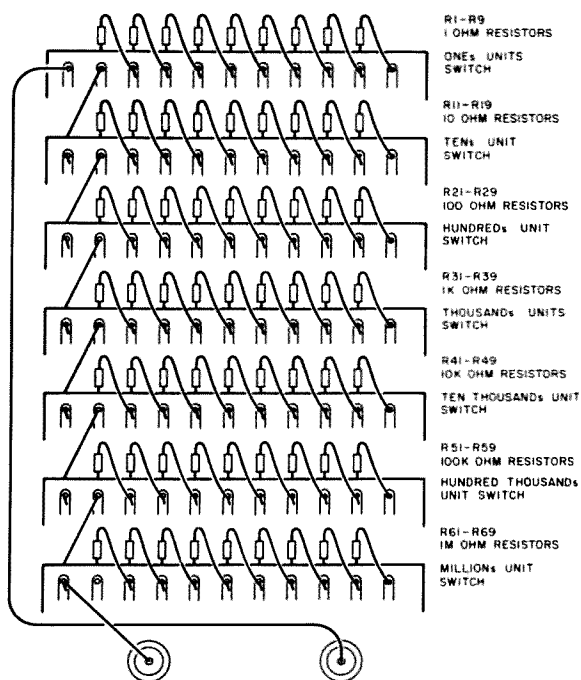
Back view of the switch assembly showing resistor layout and connection.
